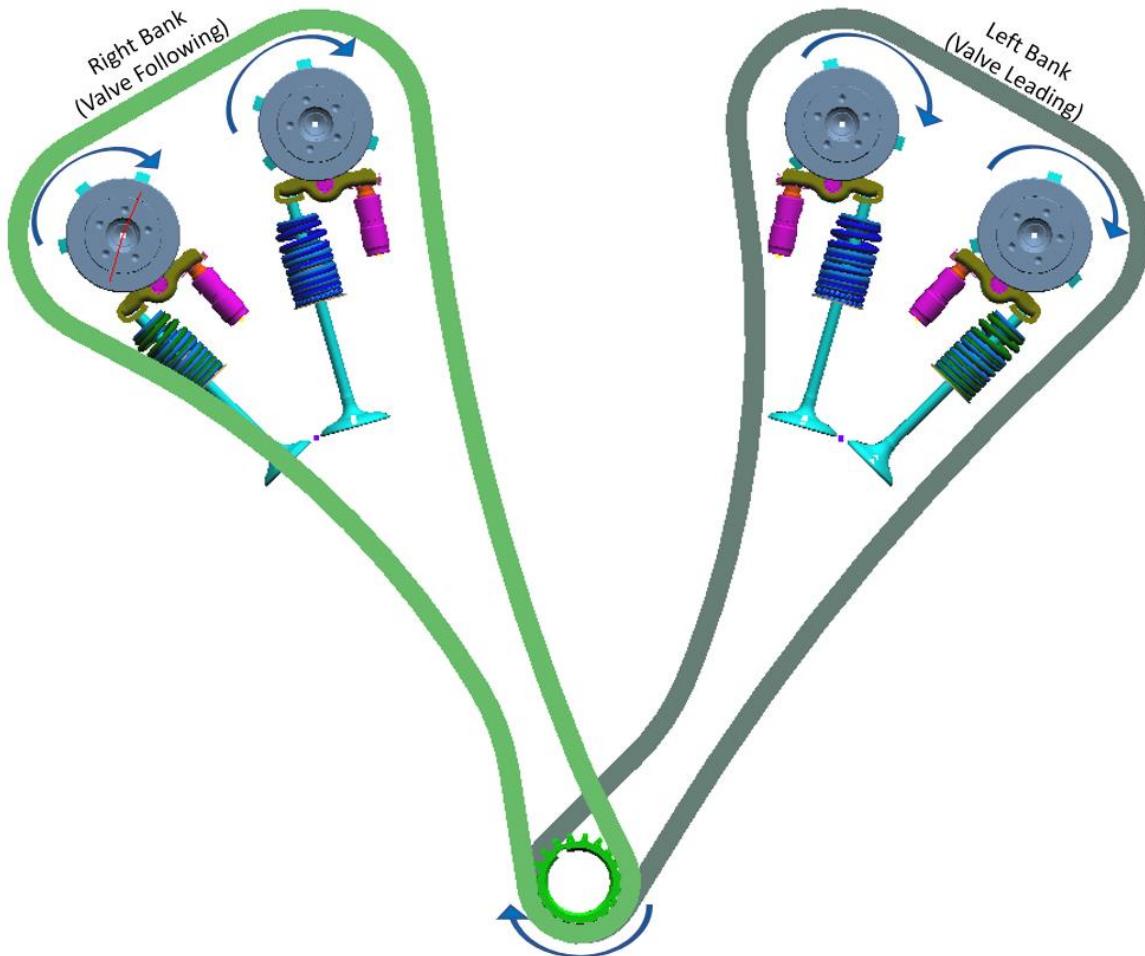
2.7/3.0L V6 Valvetrain Layout (Front View)
